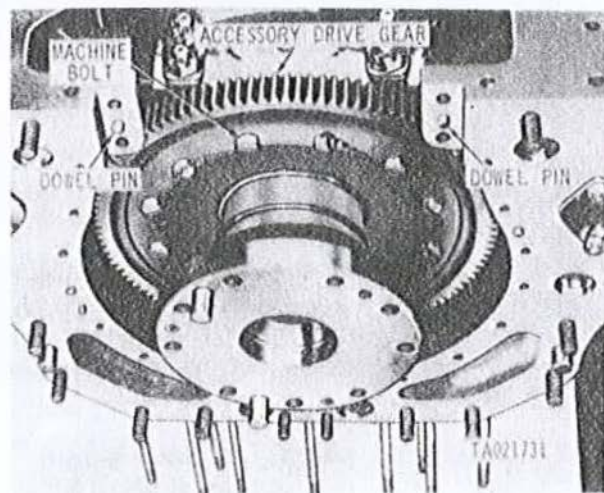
Removing or installing accessory drive gear mounting bolts.
